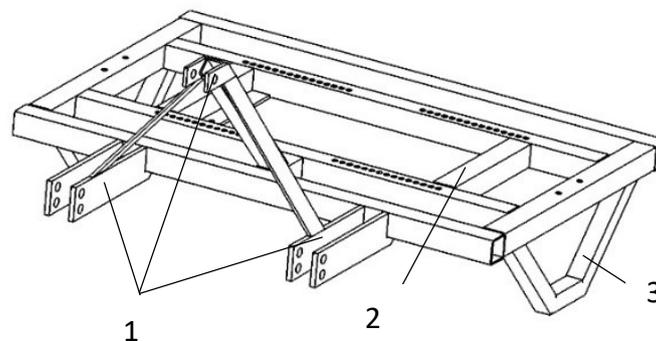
Structure of the frame: 1) three-point hitch; 2) upper frame; and 3) lower frame.
